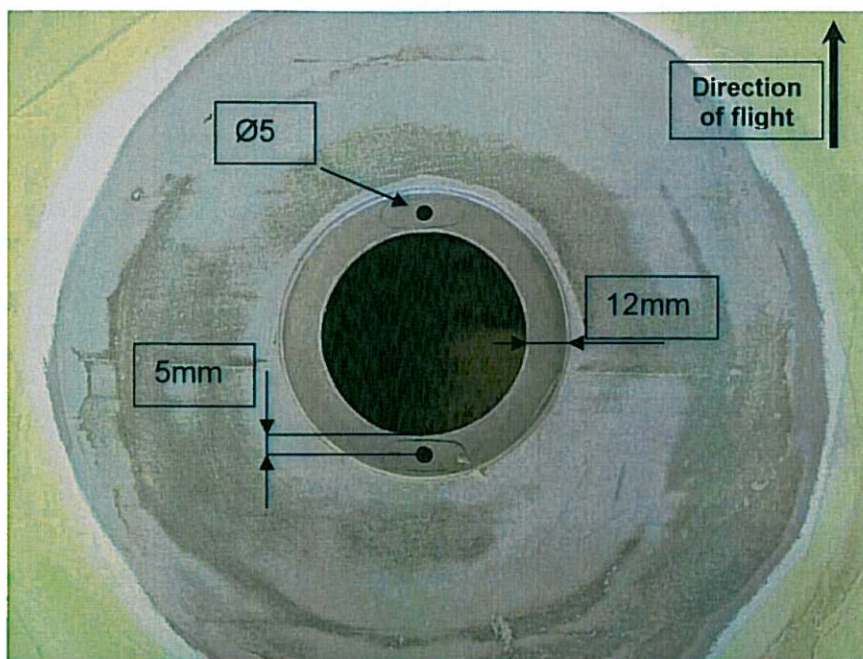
Im-print for inspection hole cover with drilled holes $\text{Ø}5$ for anchor nuts (M5).
